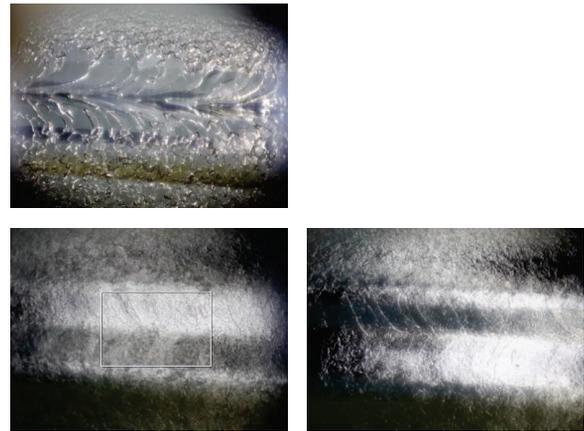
Optical inspection images; Cornell cathode (top), Ninja cathode type-I (bottom left), Ninja cathode type-II (bottom right).
